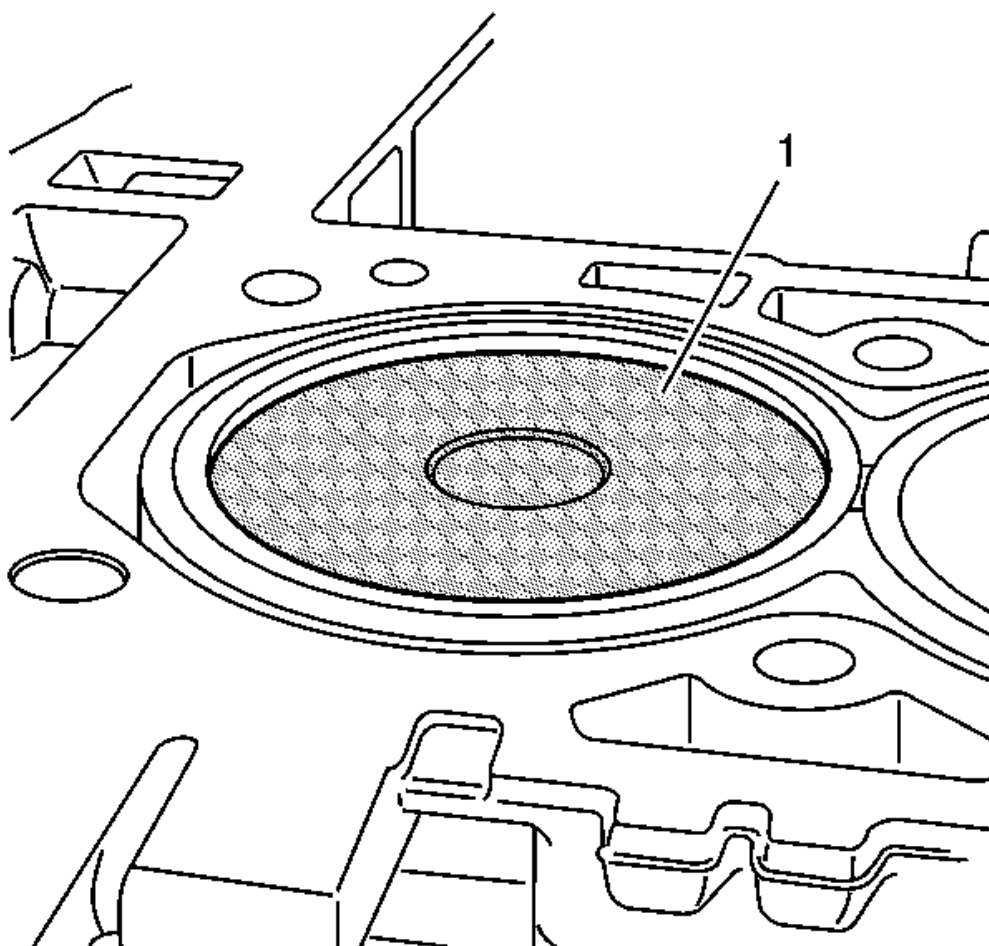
Ensure EN-45680-884 Metal Shaving Catch Plug Is 3.0 mm (0.12 In) Below Top Surface Of Cylinder Bore Sleeve
